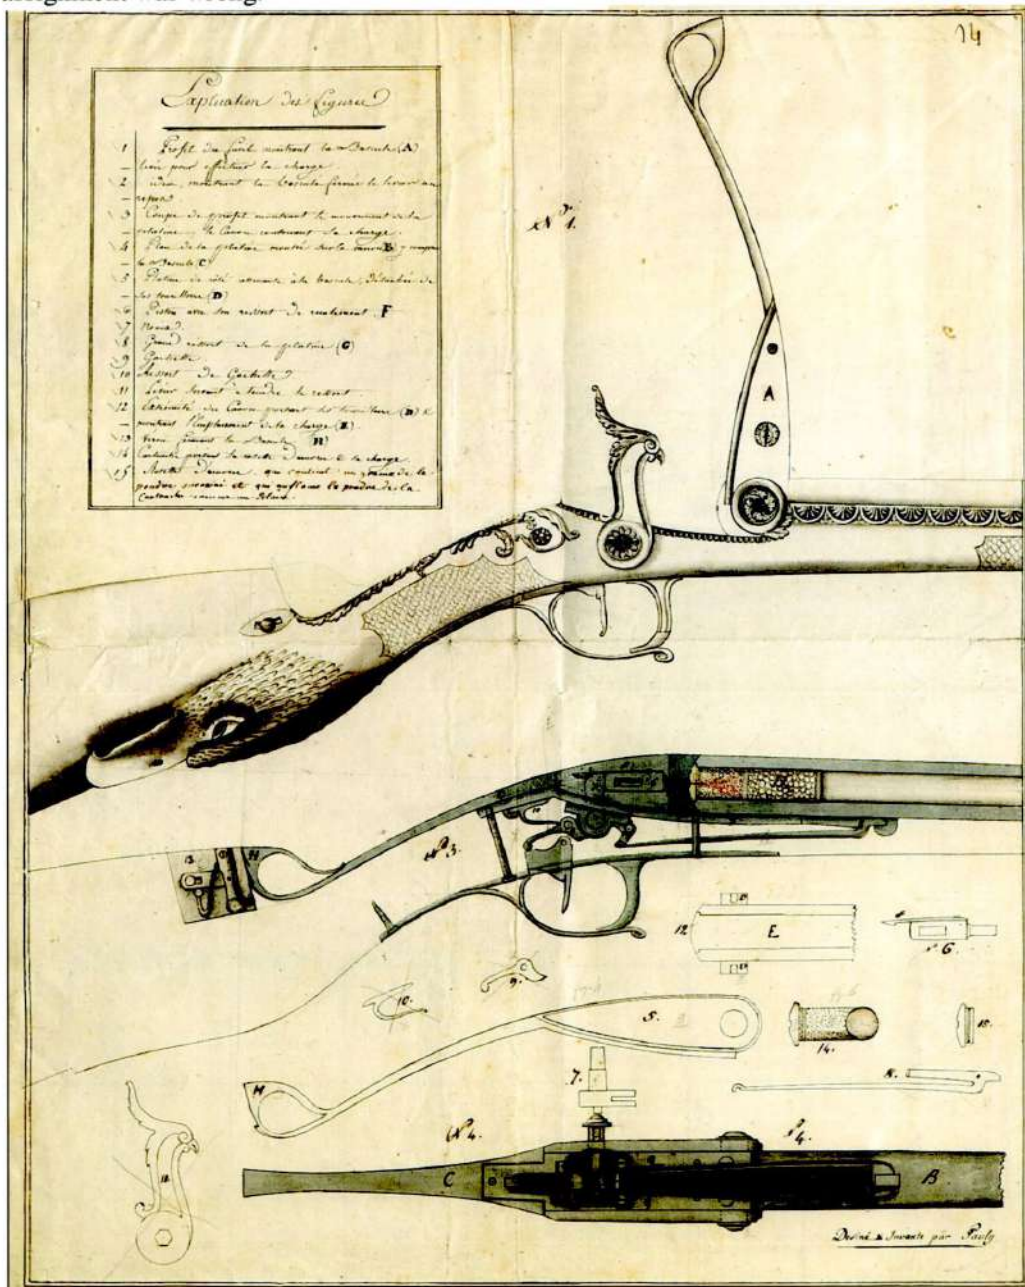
The whole page of the drawings with some colored parts. Note "*Desiné & Invante par Pauly*" on lower right corner.
